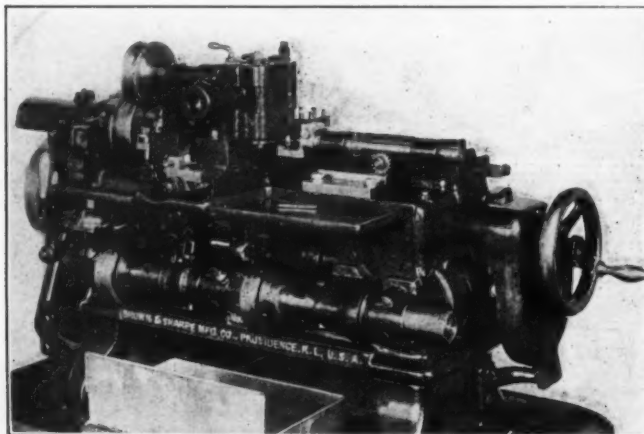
DOUBLE MILLING OPERATION ON B. & S. AUTOMATIC SCREW MACHINE
